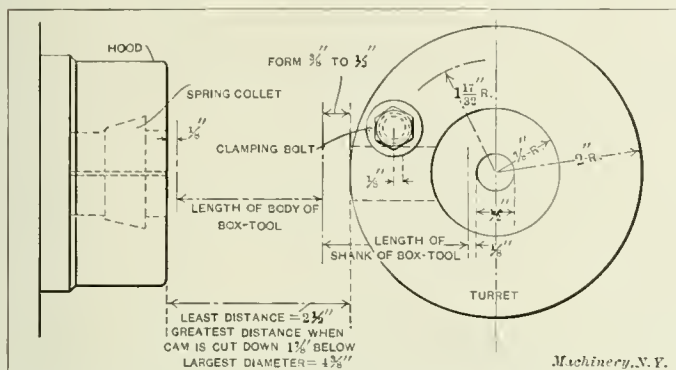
Method of Determining Length of Body and Shank of Box-tool
